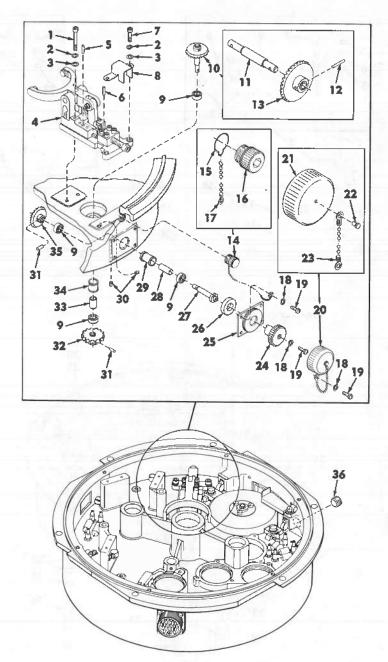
TRANSMITTER, POSITION, GUIDED MISSILE /9007947/-PARTIAL EXPLODED VIEW
